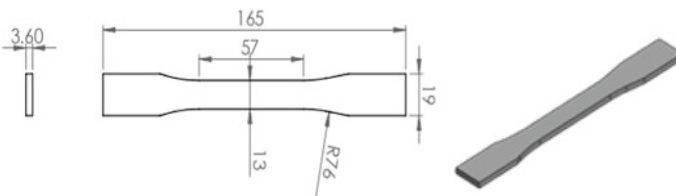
Schematic drawing of tensile specimen according to ASTM D638-14
